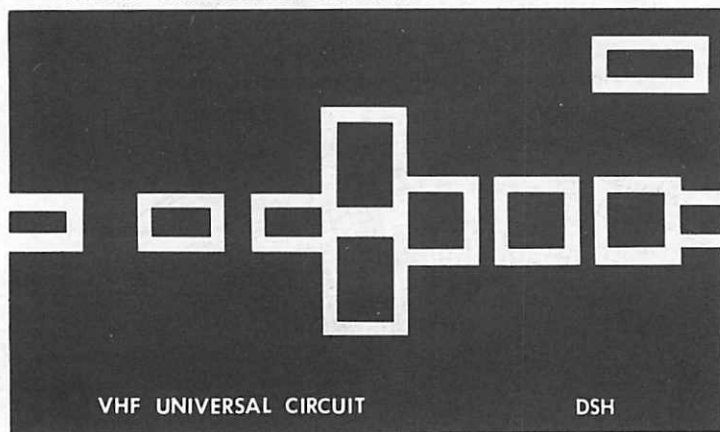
PRINTED CIRCUIT BOARD LAYOUT — 136 MHz TEST CIRCUIT
